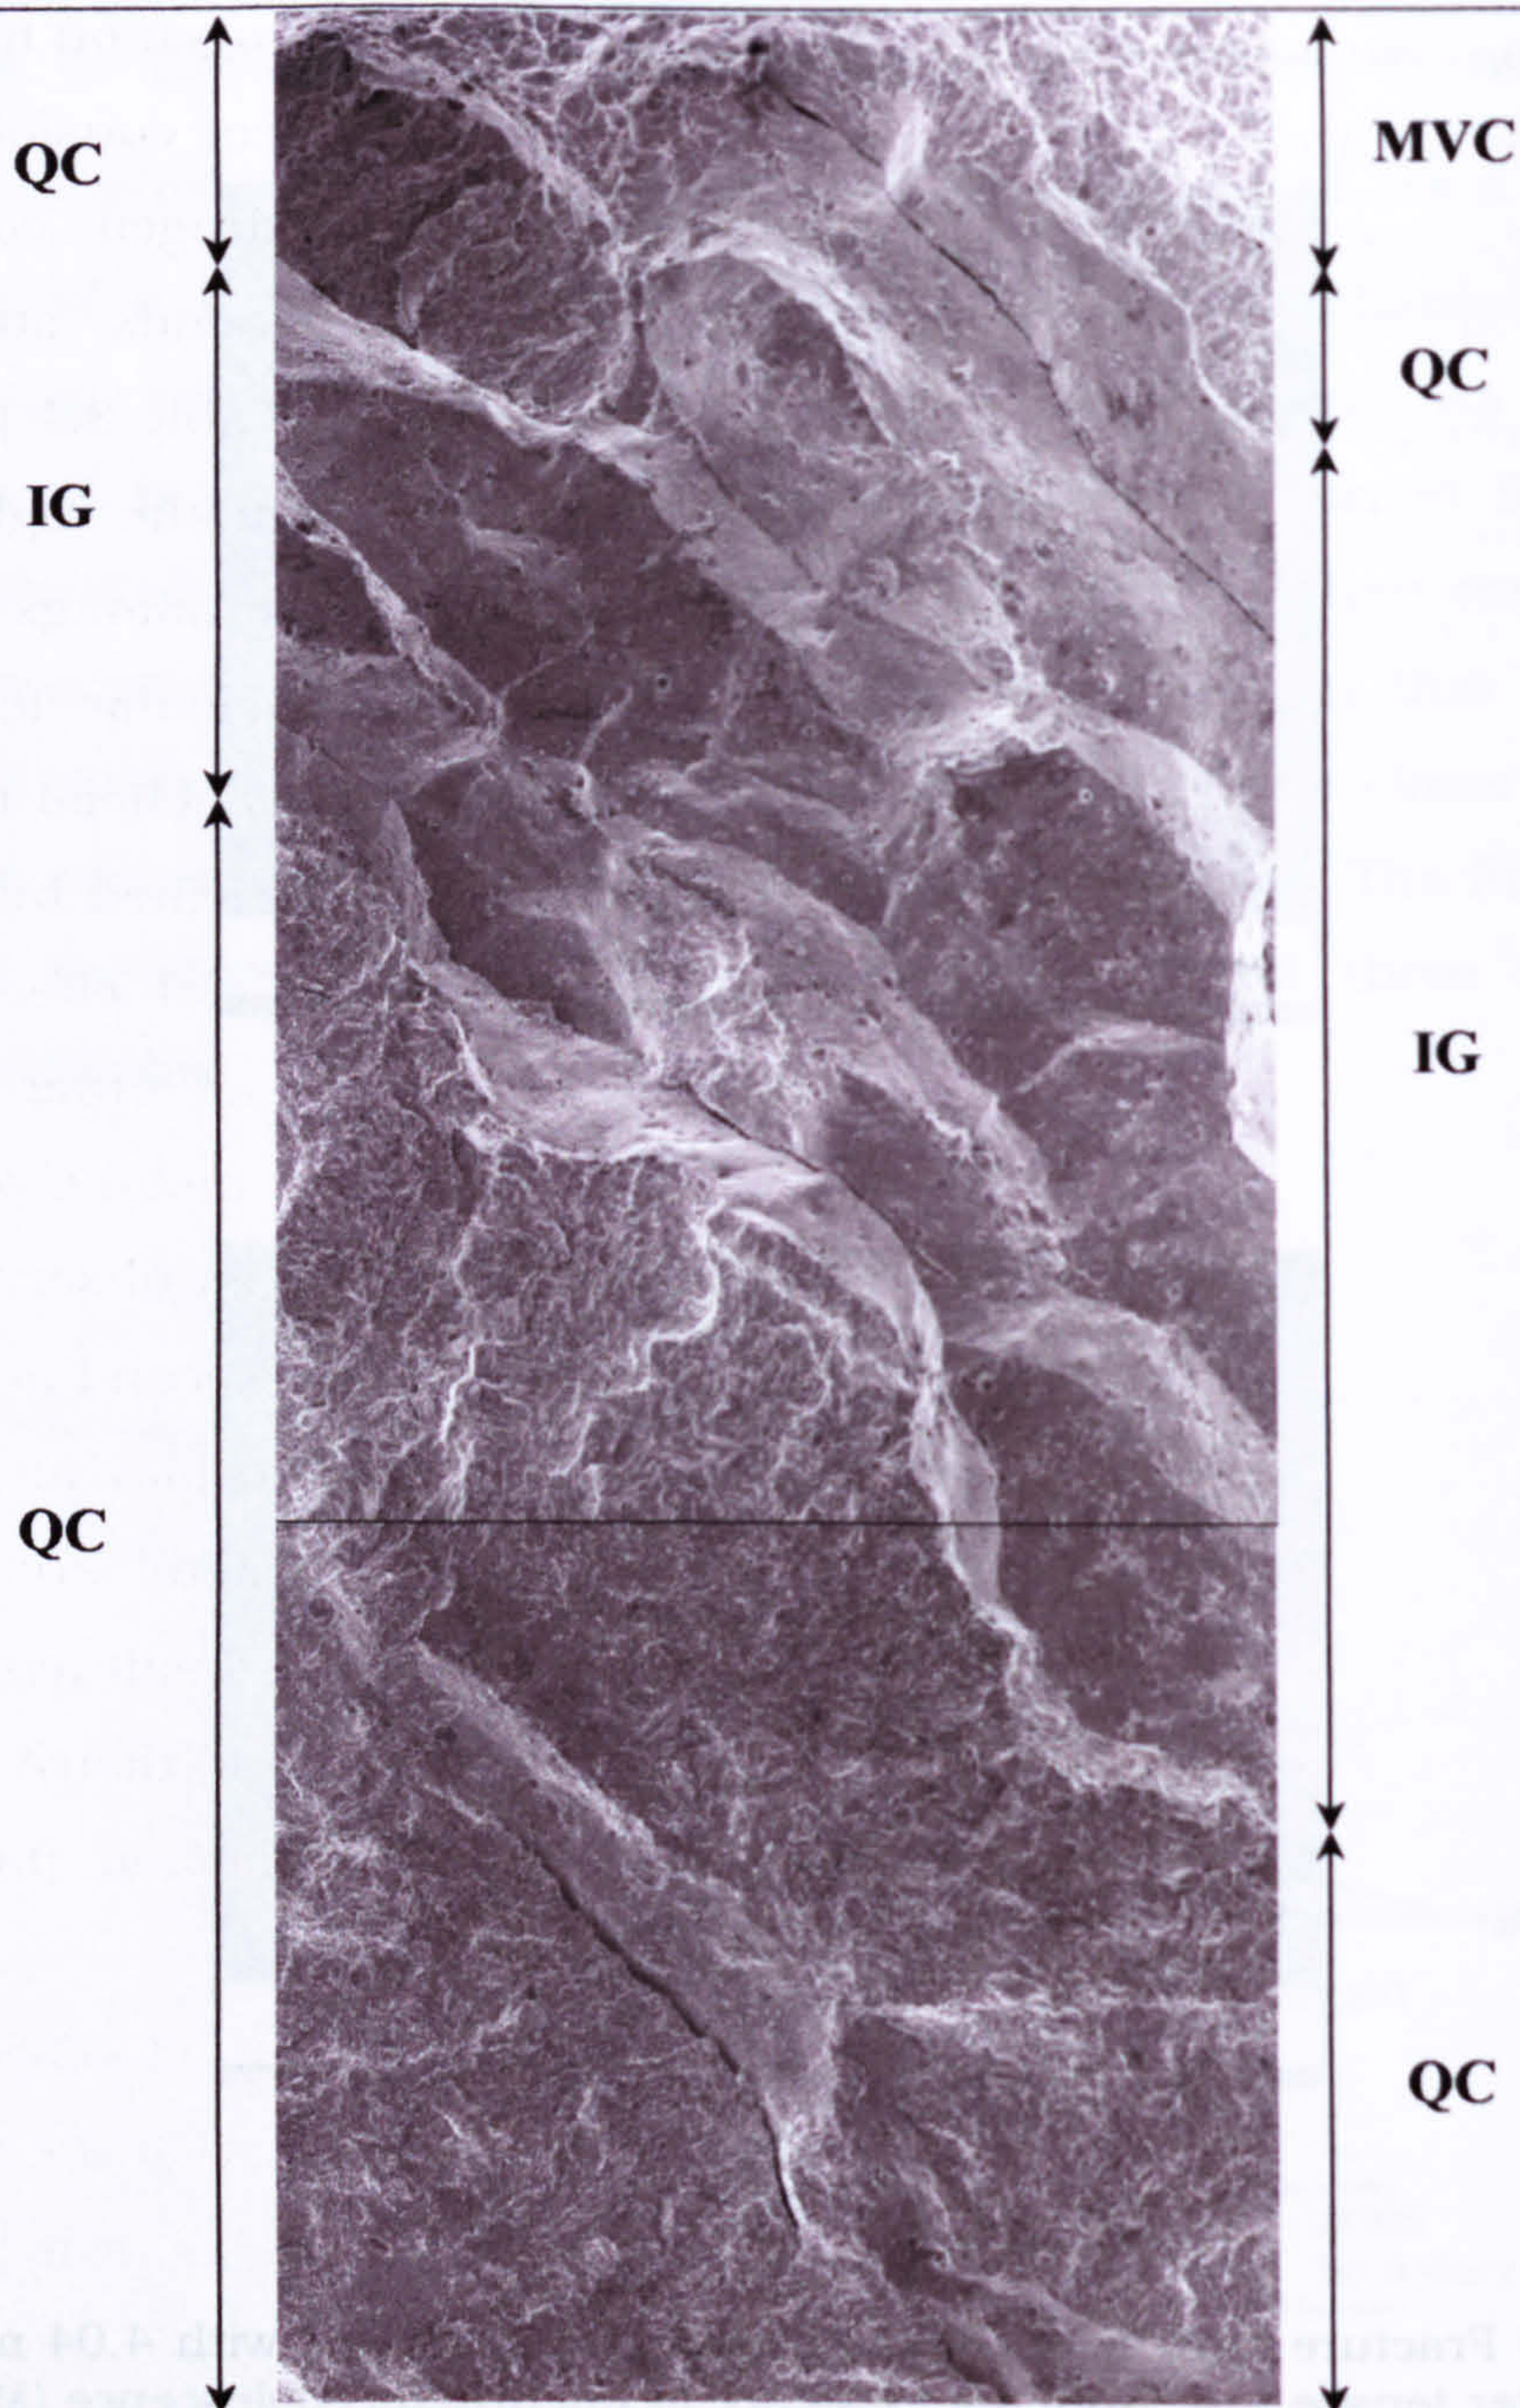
Fracture surface of CWX331 weld metal charged with 4.88 mL/100 g of hydrogen after tensile test. Figure shows large areas of IG and QC fracture.
